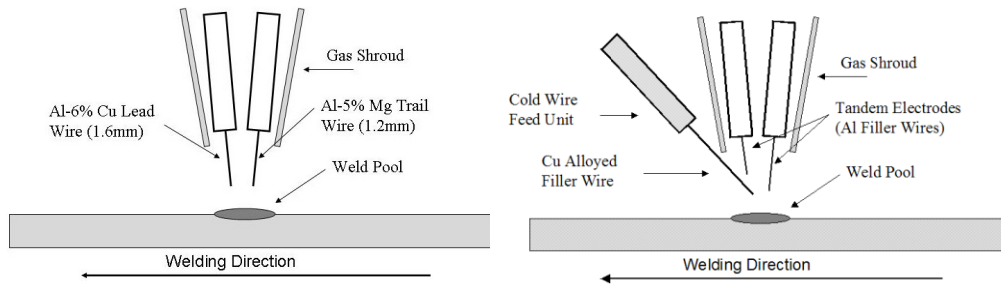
Tandem mixed wire welding configuration; Fig 72b. Three wire mixed welding configuration
